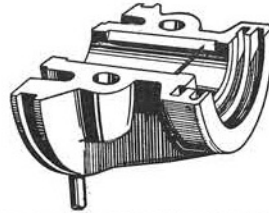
B. Crankshaft rear bearing caps for replacement on crankshafts on which the rear bearing surface has become worn. It has a 1.618 bore and is 3.013 between the thrust faces as compared with the standard cap which has a 1.623 bore and is 1.624 between the thrust faces.
